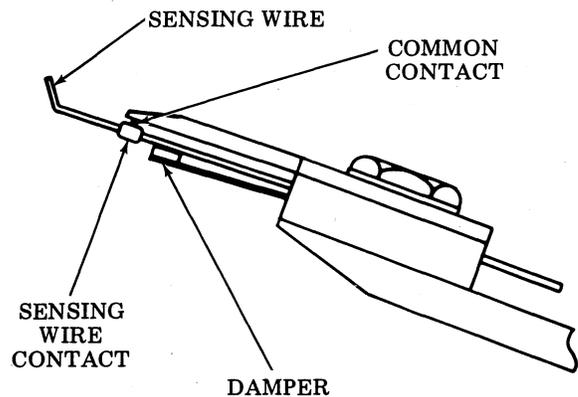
Tape Sensing Wire (Without Tape in Reading Head)
